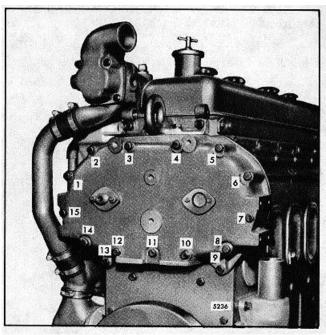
Balance Weight Cover Bolt Tightening Sequence
